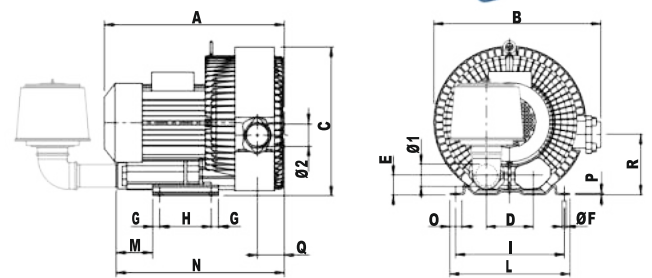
Double STAGE - Double CHANNEL - Double IMPELLER
